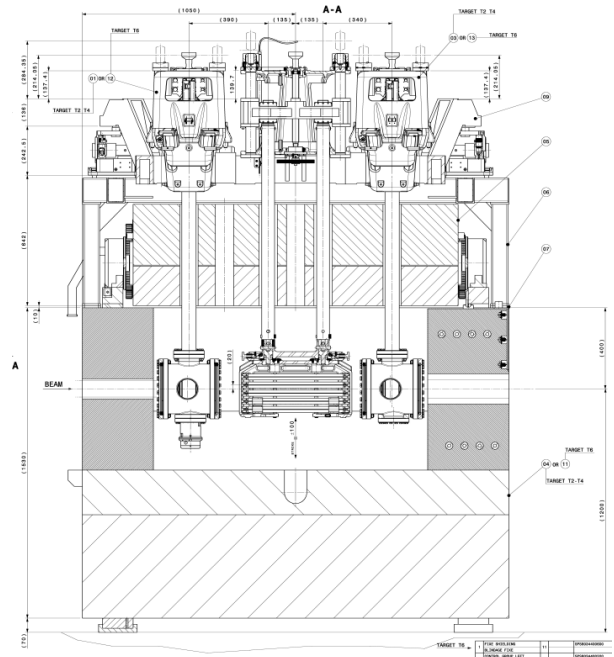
Cross-sectional cut of the target assembly showing also the two TBIs [15]
